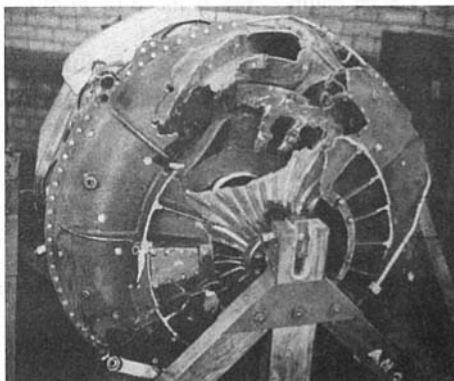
Failure of compressor impeller on W.2/500 engine
